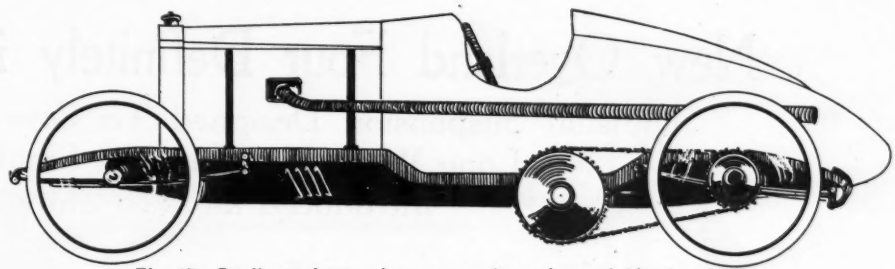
Small speedster using motorcycle engine and bicycle wheels
